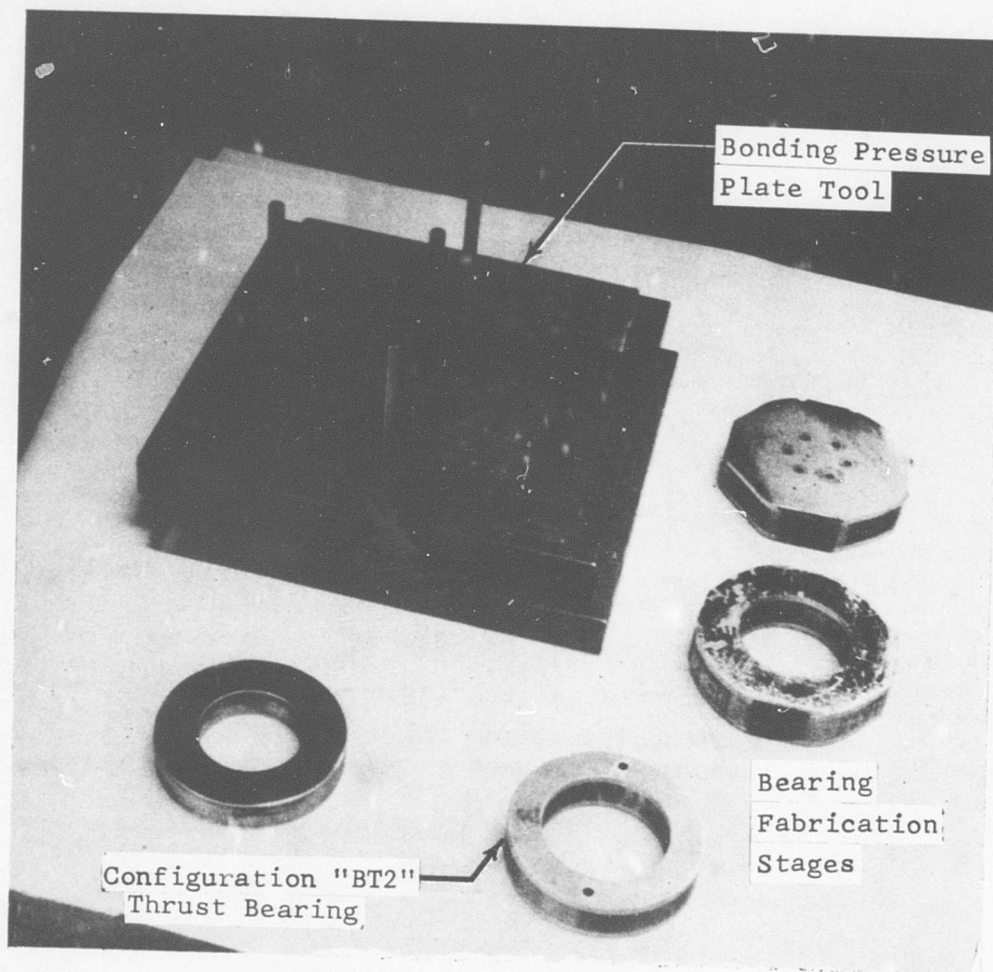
FABRICATION PROCESS FOR BONDED-THIN-ELASTOMER-LAYER THRUST BEARING.
